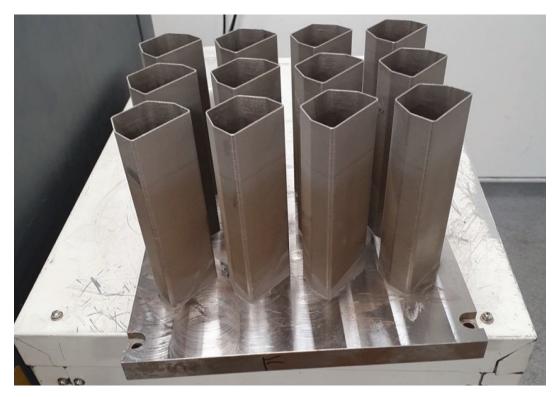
Twelve steel specimens that have been built at TWI with an EOS M290 (400W) machine.
